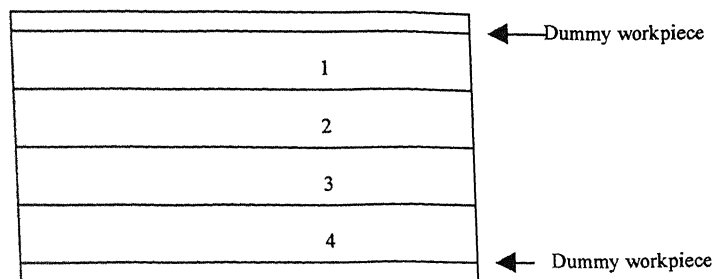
The assembly of composite (1, 2, 3 and 4) and dummy workpieces.
